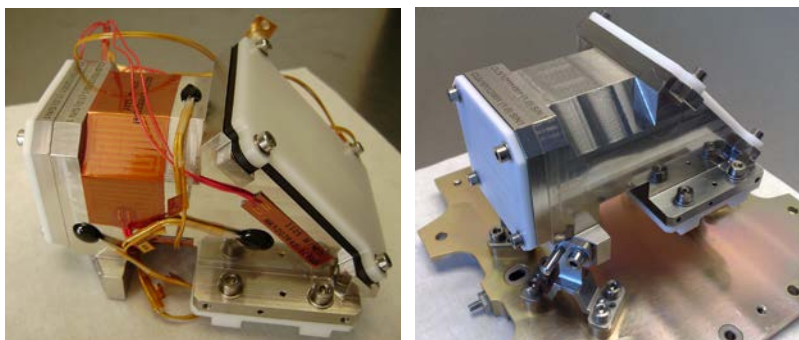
Heaters & Thermal Sensors on Optical Assembly (LEFT), Optical Assembly supported by Bipods
